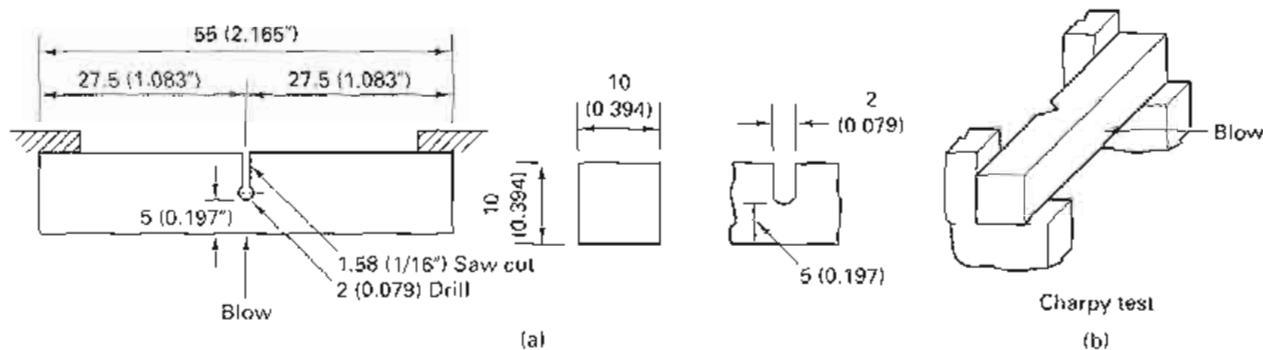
(a) Standard Charpy impact specimens. Illustrated are keyhole and U notches; dimensions are in millimeters with inches in parentheses. (b) Standard V-notch specimen showing the three-point bending type of impact loading.
